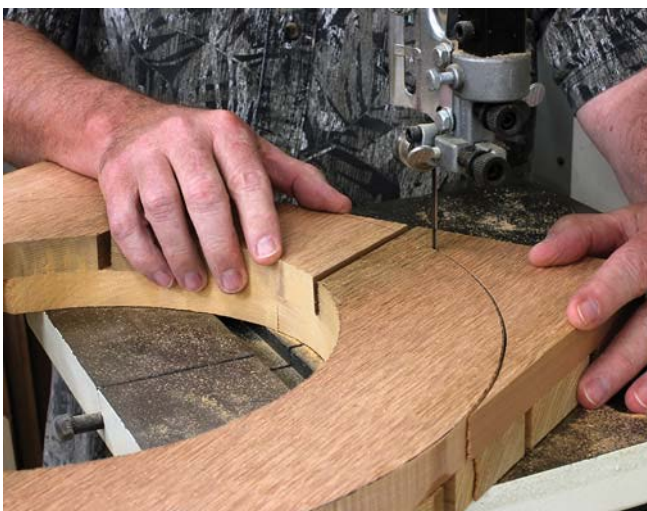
You can cut the frame shape with jig saw, scroll saw or coping saw, but a band saw gives superior results.
